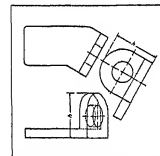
AUXILIARY ELEVATION PROJECTED FROM TOP VIEW
